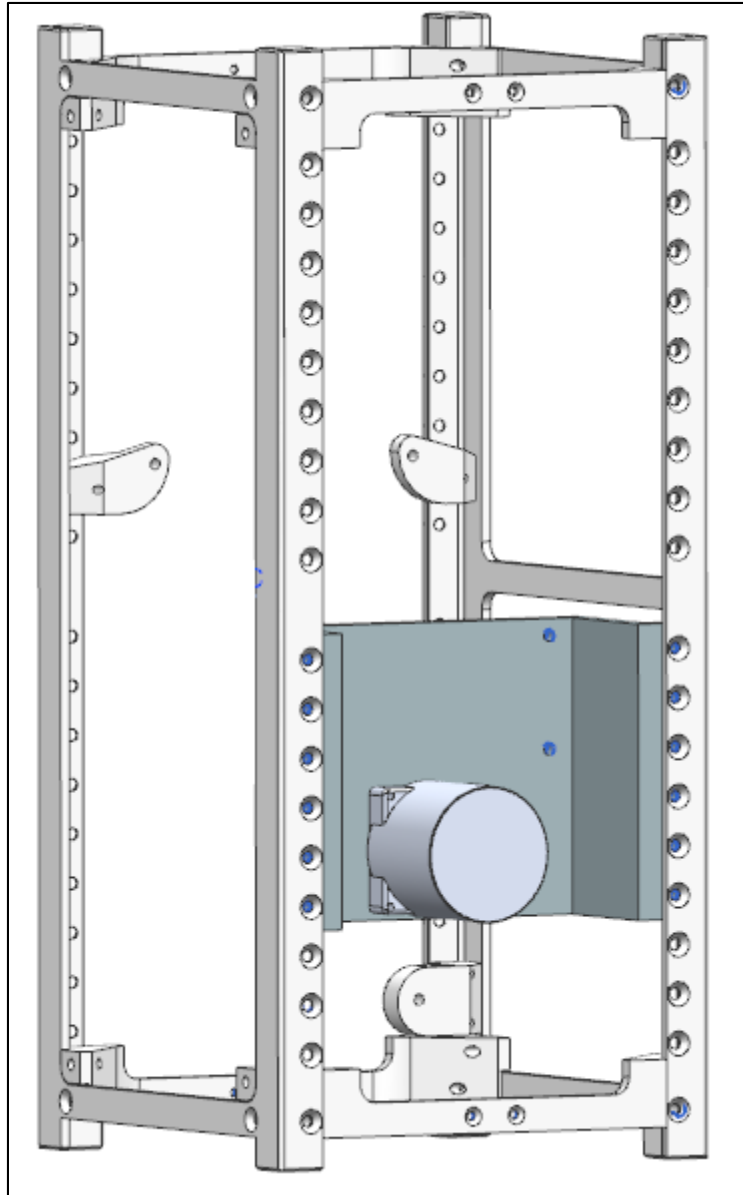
Isometric View of CAD Model Mounting TIC EDU onto a 2U CubeSat HAB Frame
